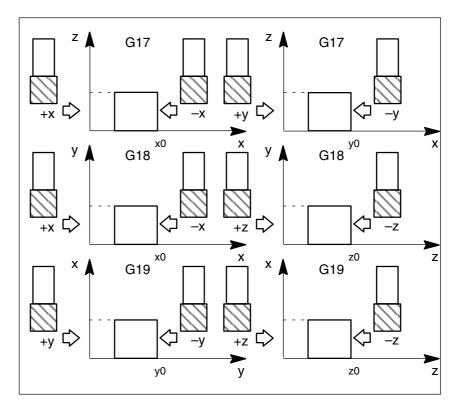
Tool diameter for selected planes G17, G18 and G19
